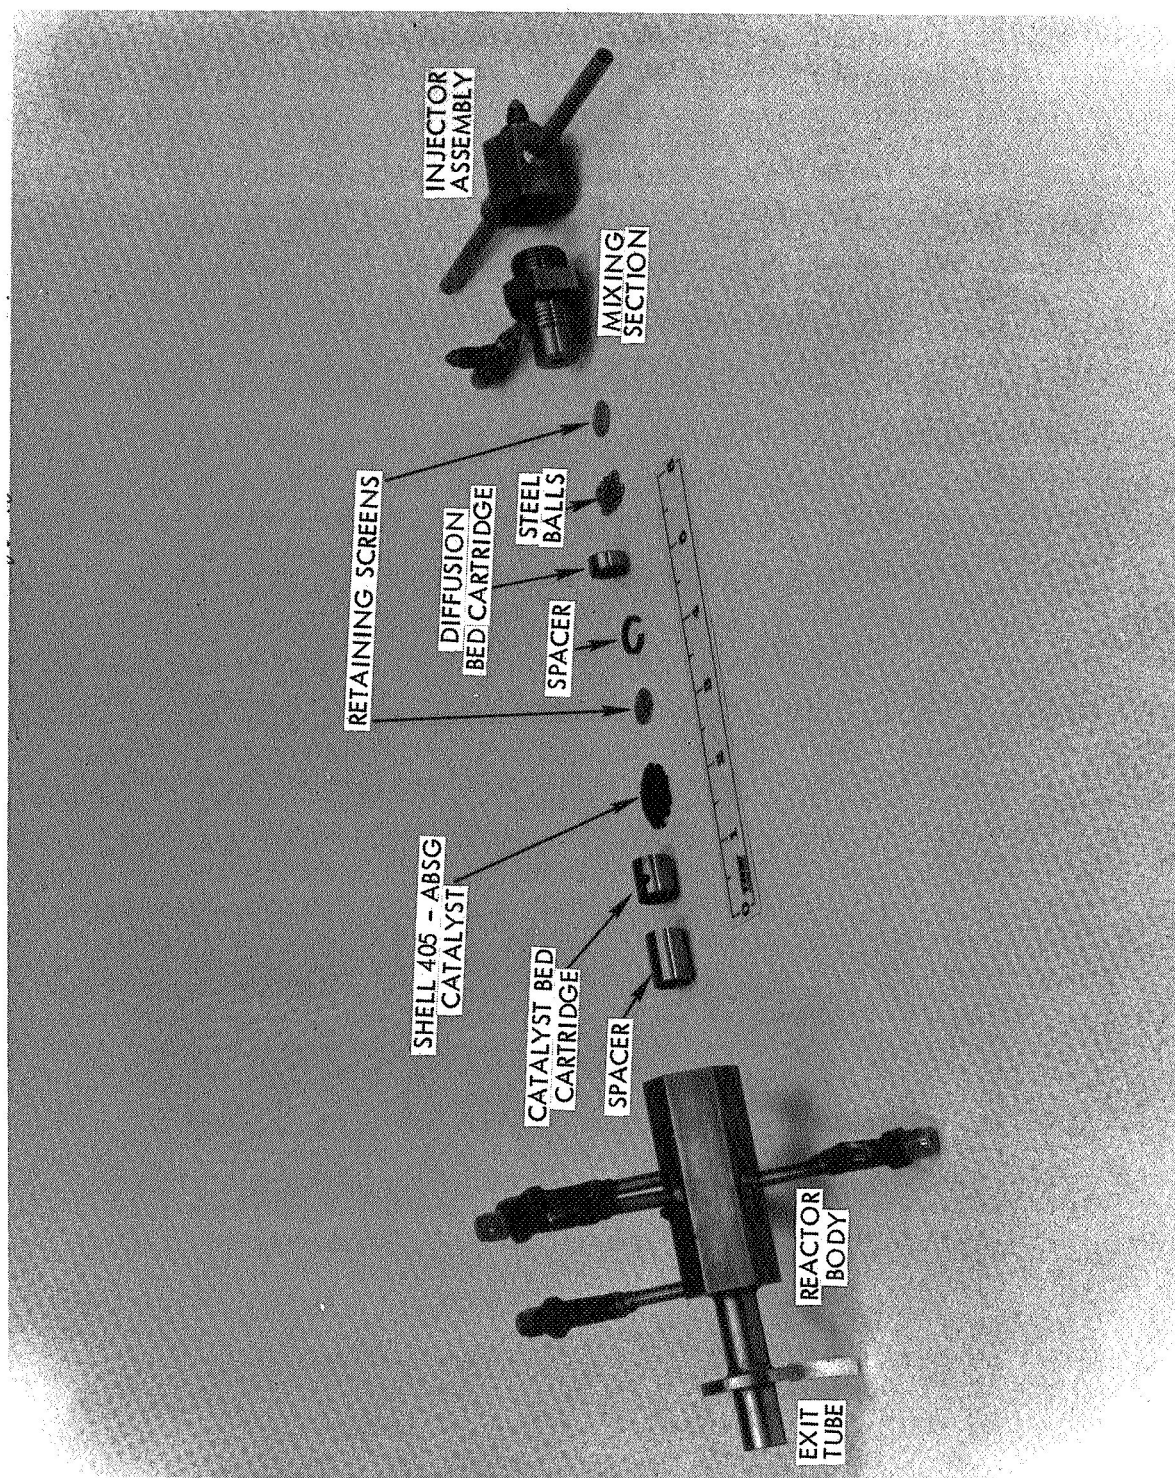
Disassembled Catalytic Reactor Igniter — High Chamber Pressure Thruster
